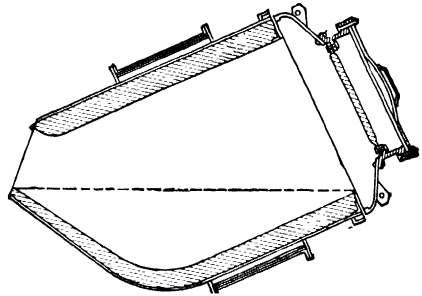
Position of Eccentric-type Converter while Receiving Charge.
